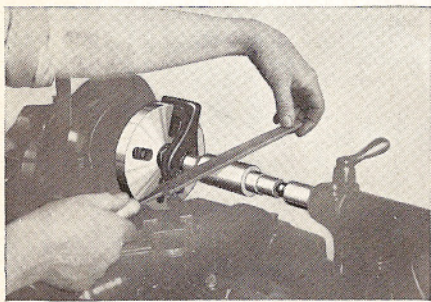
Lathe is Practical for Filing and Polishing Bushings, Shafts, Parts, etc.
